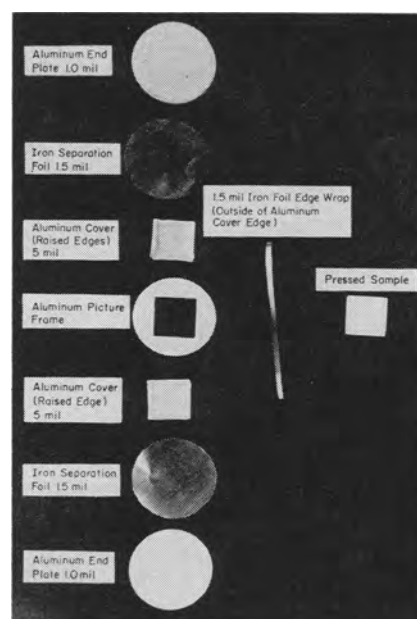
Assembly for hot-pressing aluminum-clad uranium samples.
